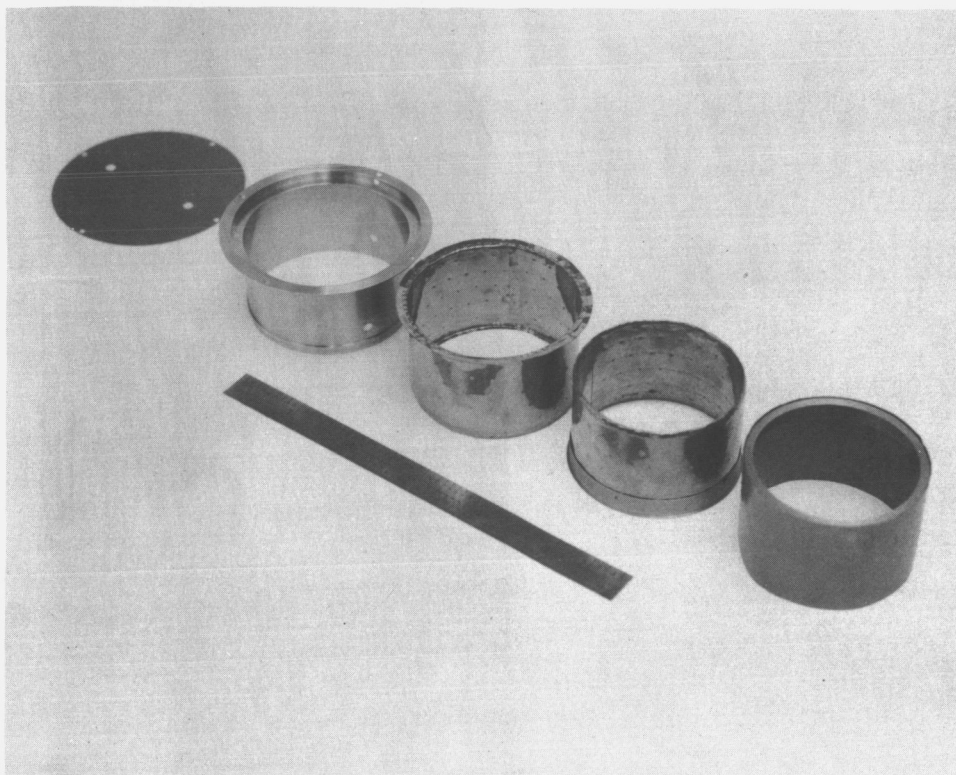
Exploded View of Major Thermal Shield Subassemblies.
